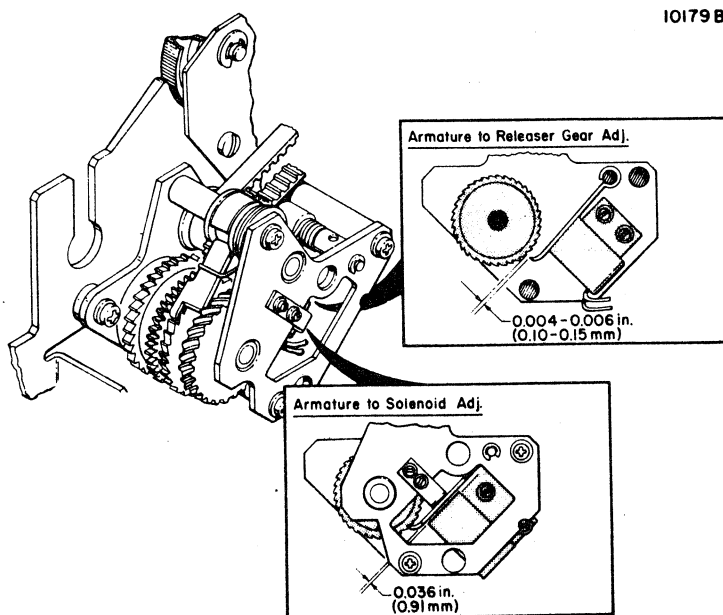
ARMATURE TO RELEASER GEAR AND
